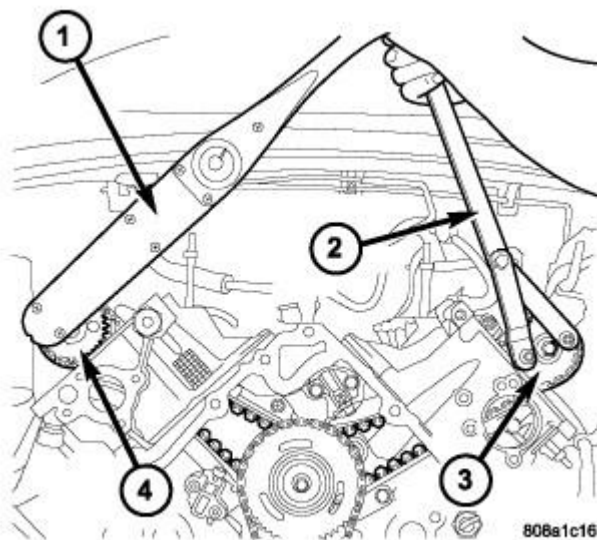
Camshaft Sprocket Installation-Right Cylinder Head
